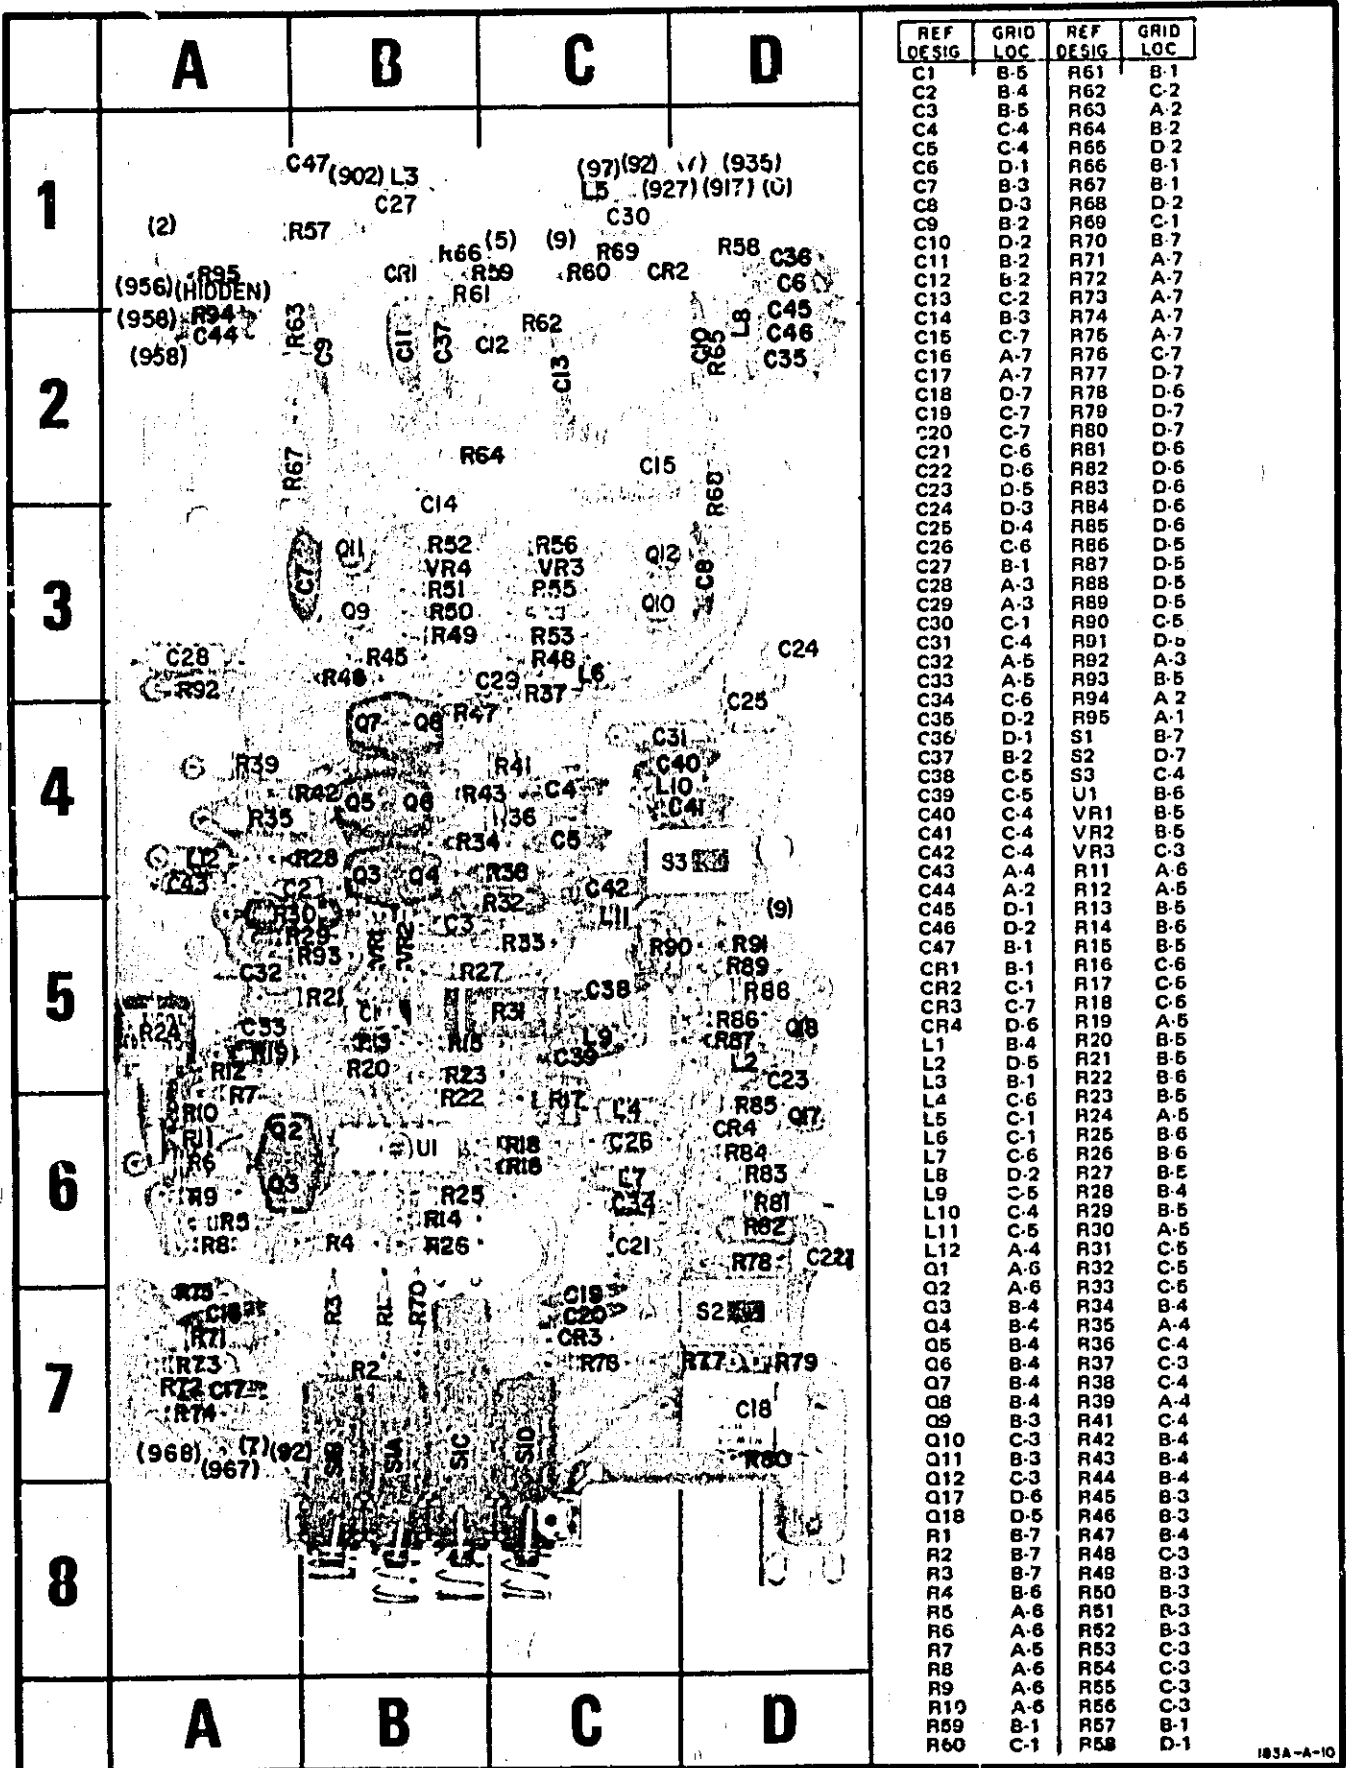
Component Locations, Horizontal Amplifier Board A11A1
